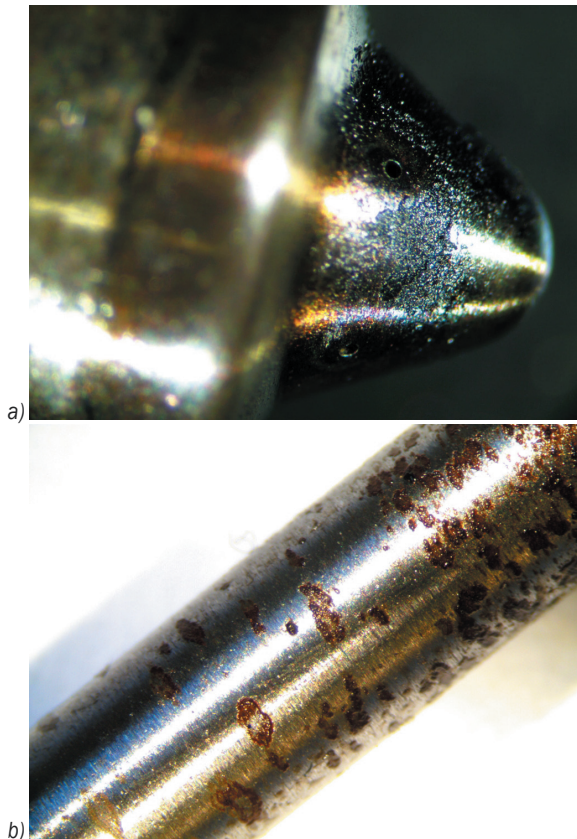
Examples of pitting corrosion; a) Bosch fuel injector nozzle tip, and b) Denso needle
